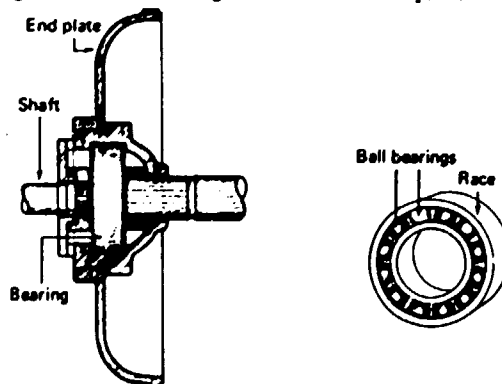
The ball bearing at right mounted in the end plates as shown.
